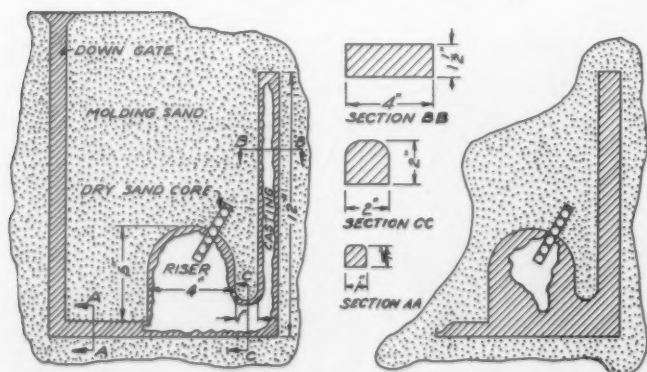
DETAILS OF TENSILE TEST SPECIMEN.
